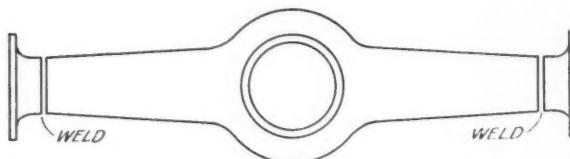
Welding forged ends to pressed steel axle housings
